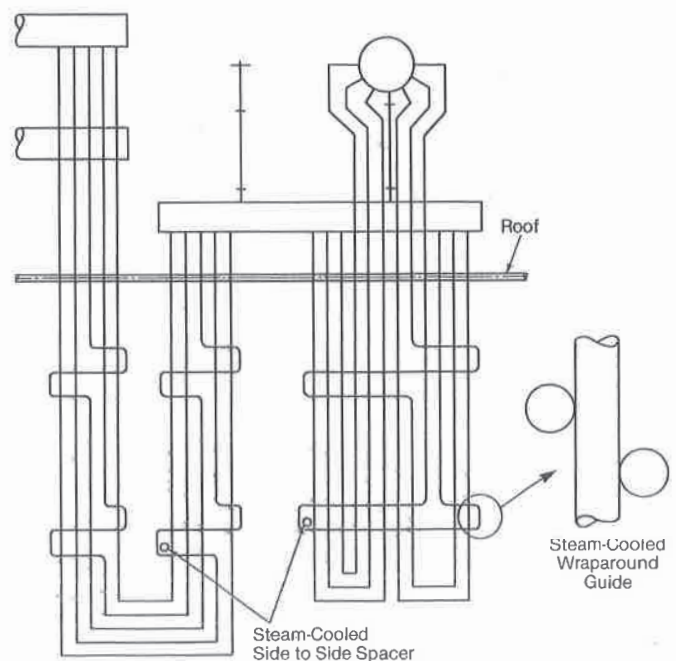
Pendant superheater section with steam-cooled wraparound guide.
